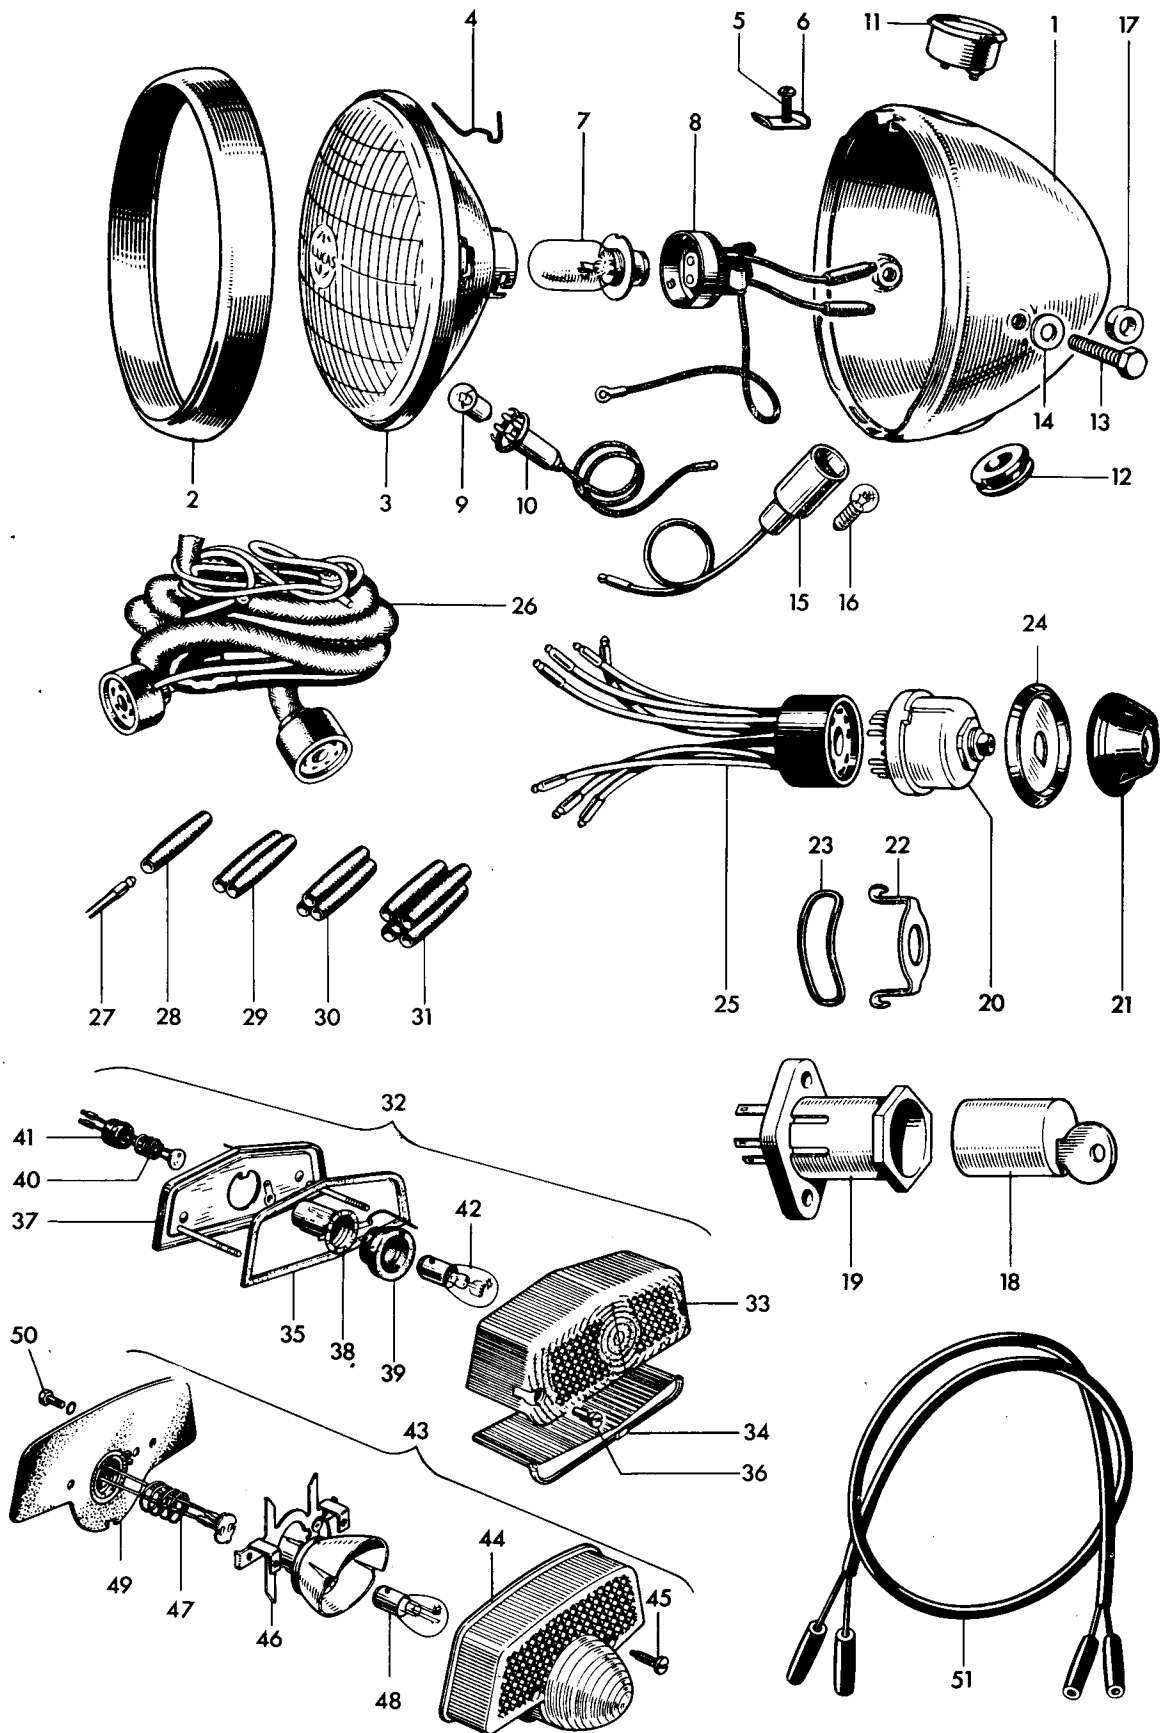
HEADLAMP, WIRING HARNESS, SWITCHES AND TAIL LAMP
